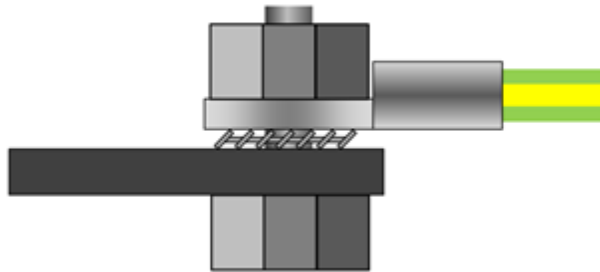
Shows bolt through panel/stay mount and serrated washer under crimp connector.
